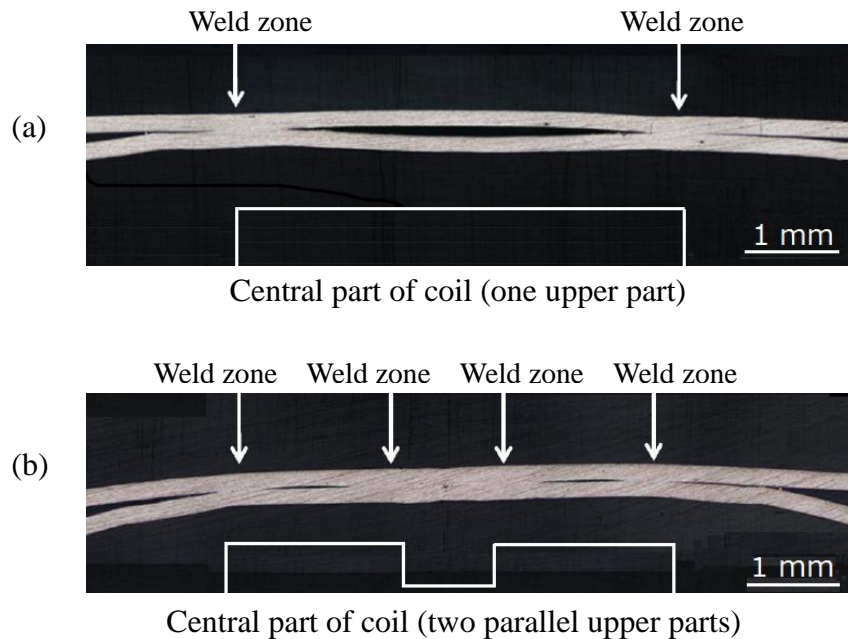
Cross sectional appearances of weld interface of seam welded Al-Al sheets.
